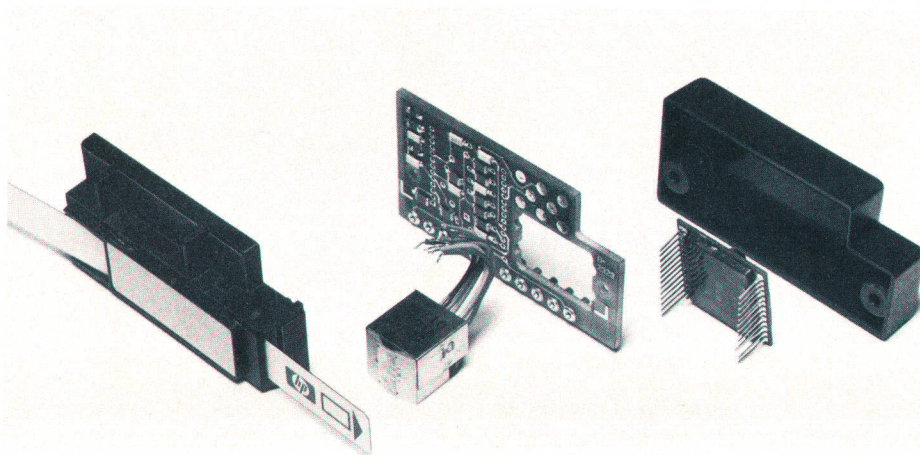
Exploded view of the optional 82400A Card Reader Module for the HP-71B.
